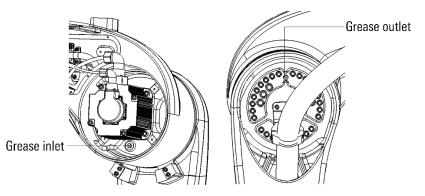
Large load manipulator replacement of J3 axis reducer grease
